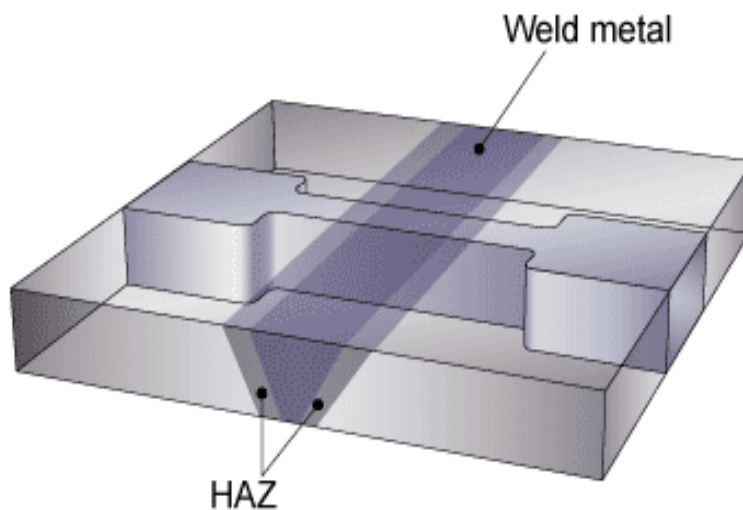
Tensile specimen from rectangular weld [28]
